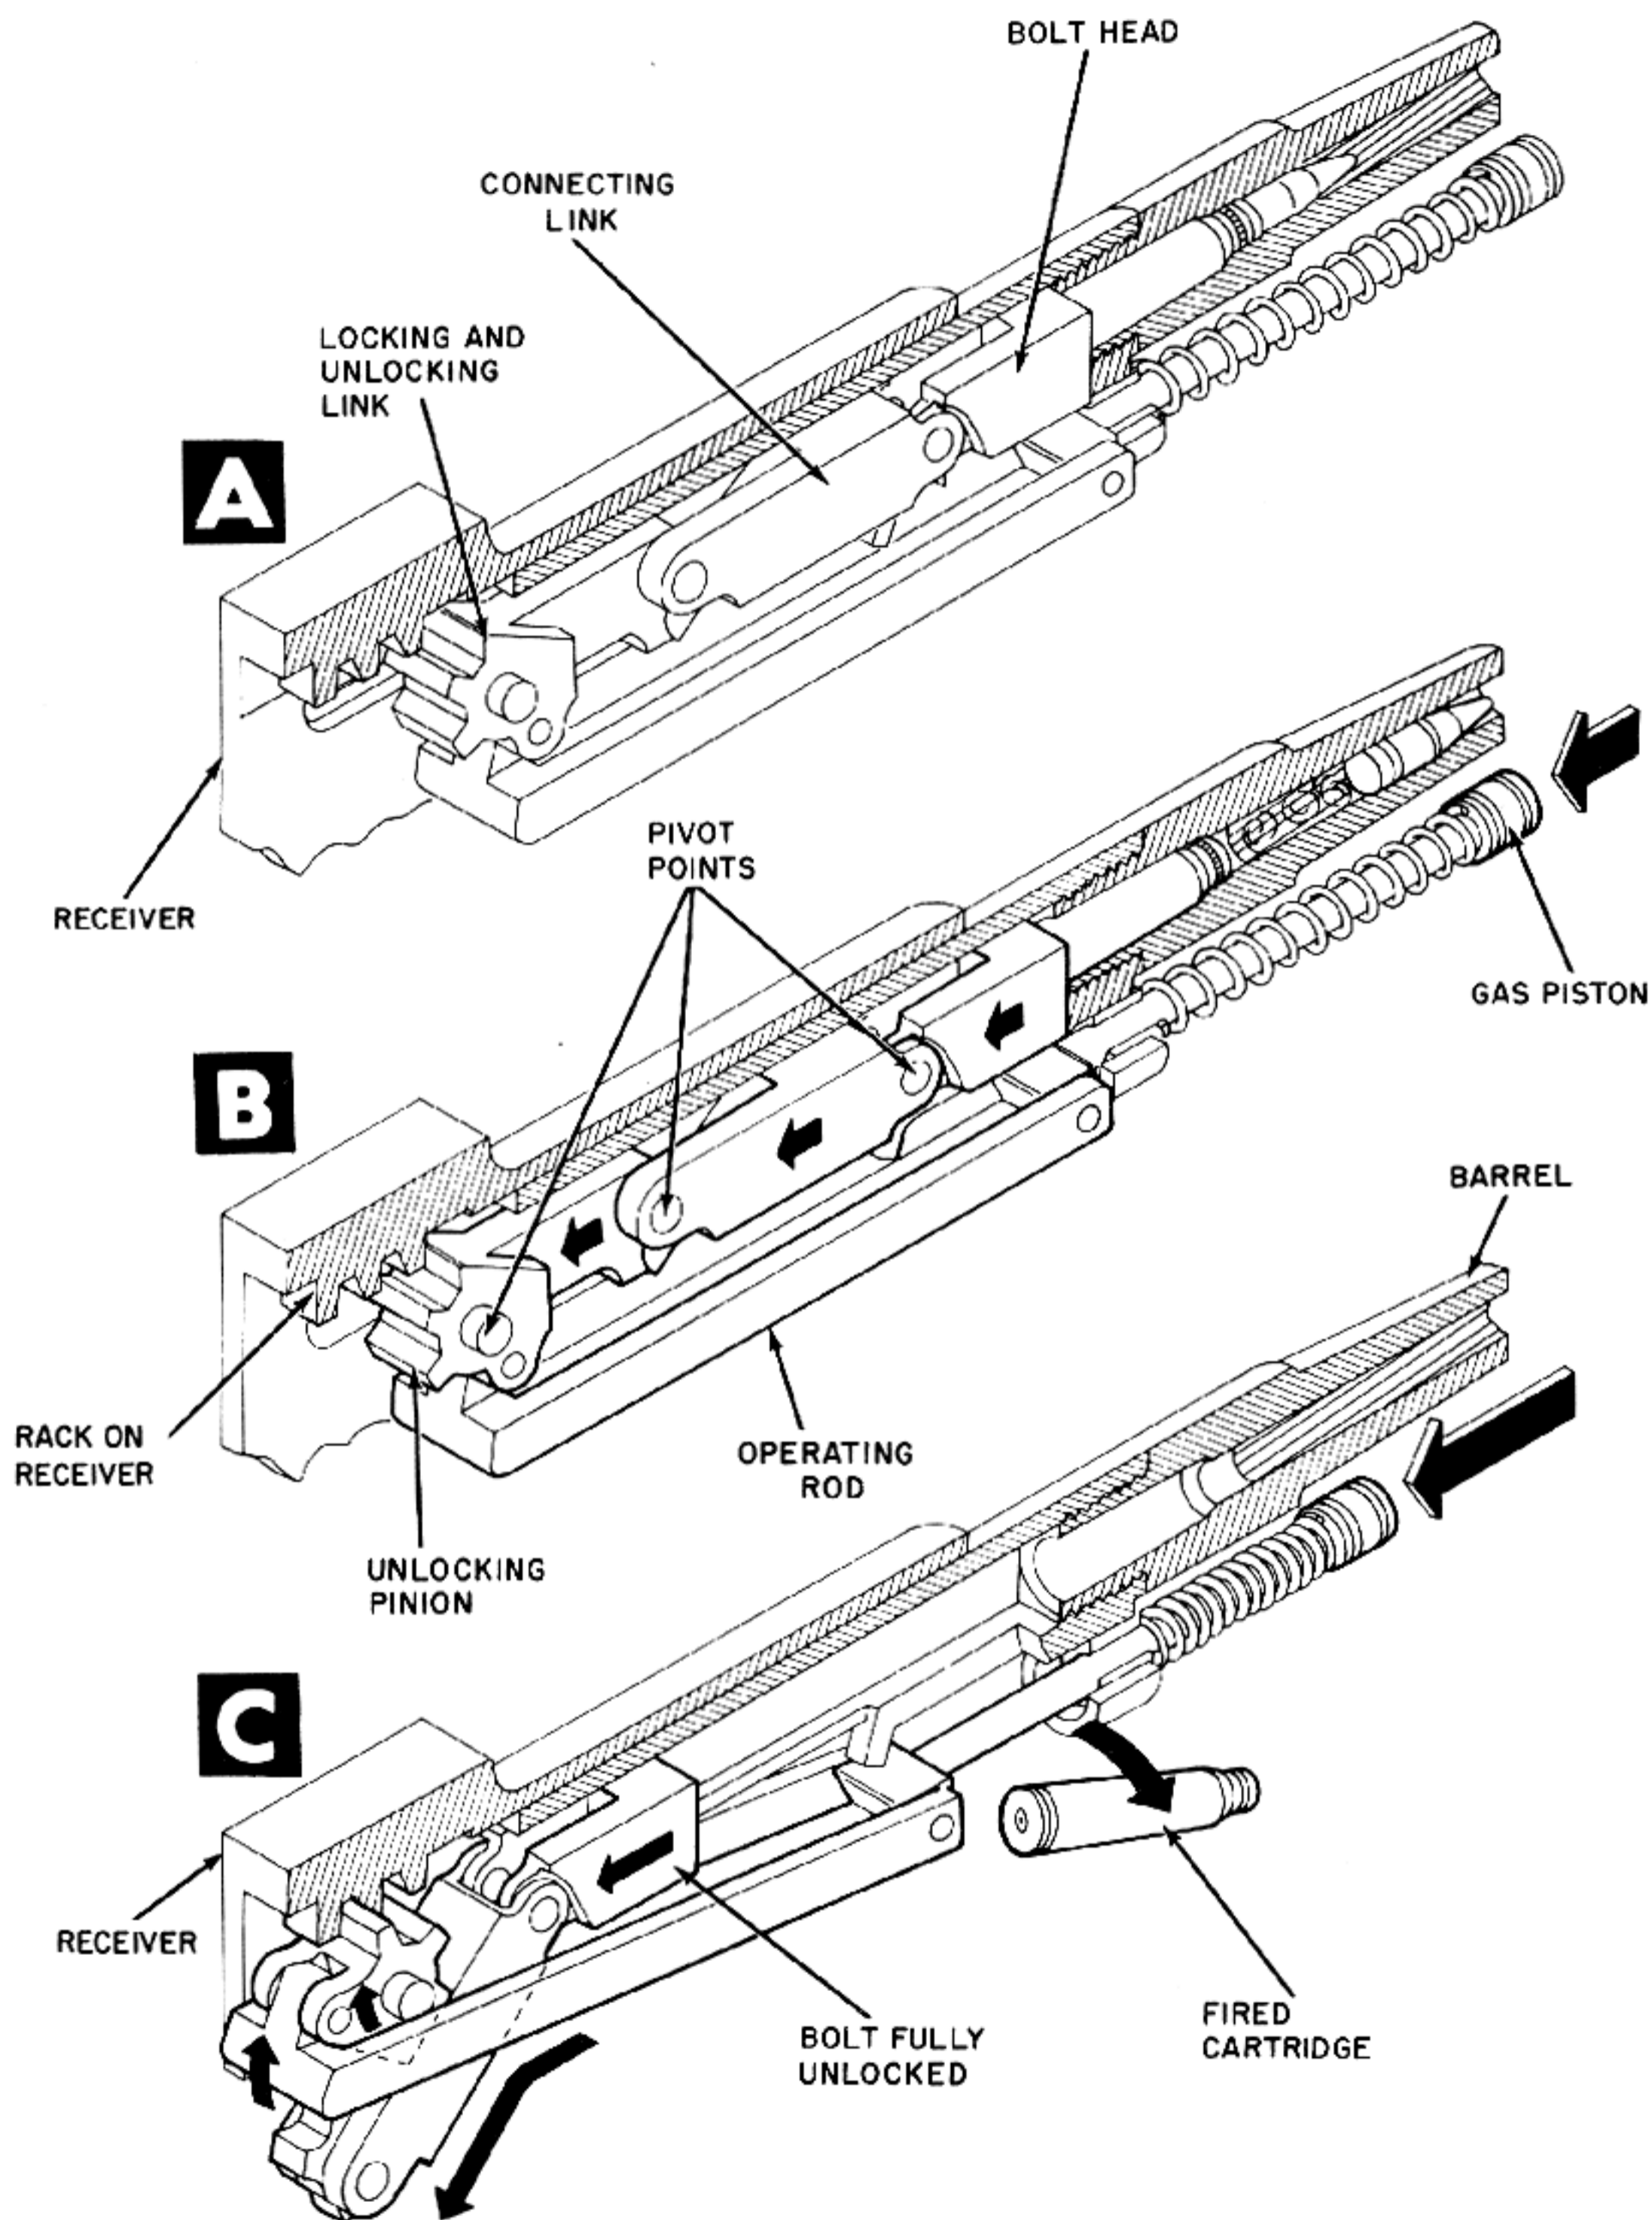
Bolt Is Unlocked When Operating Rod Rotates Unlocking Pinion.
